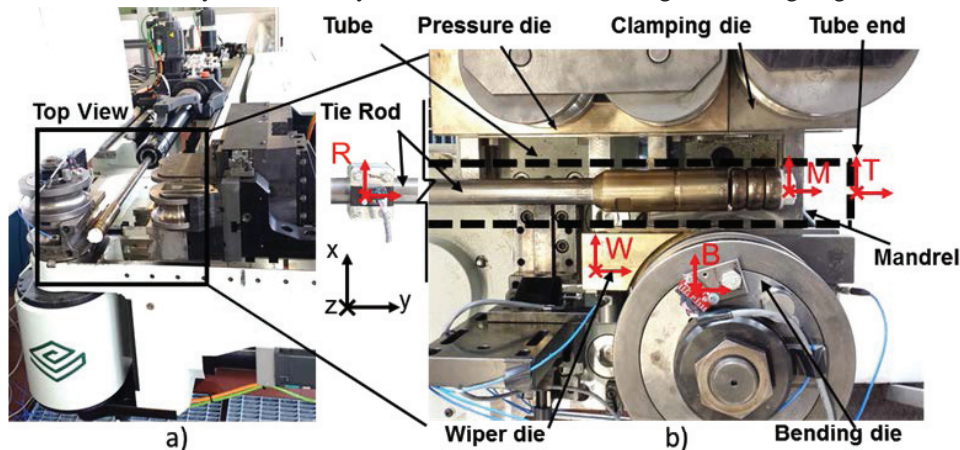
a) front view of the bending machine; b) top view of the dies instrumented with the sensors.
